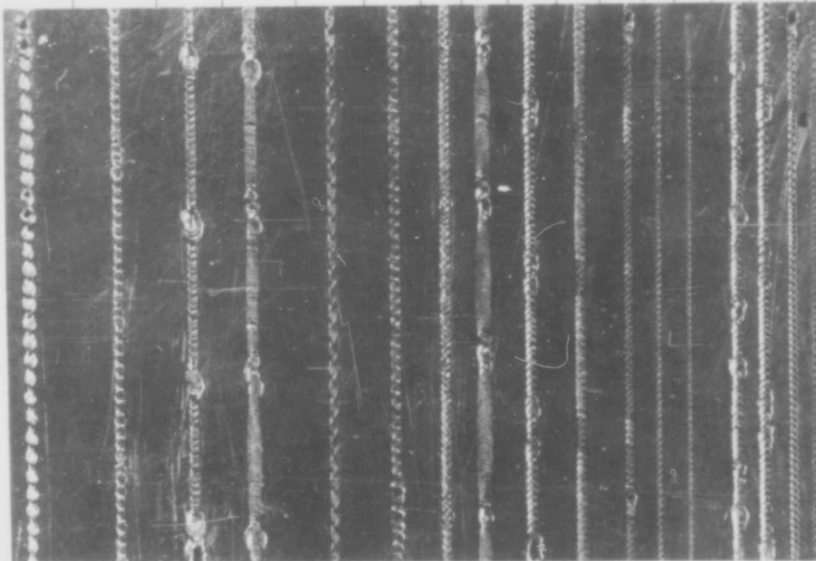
Electron Beam Test Welds on D-36 Columbium Panel
